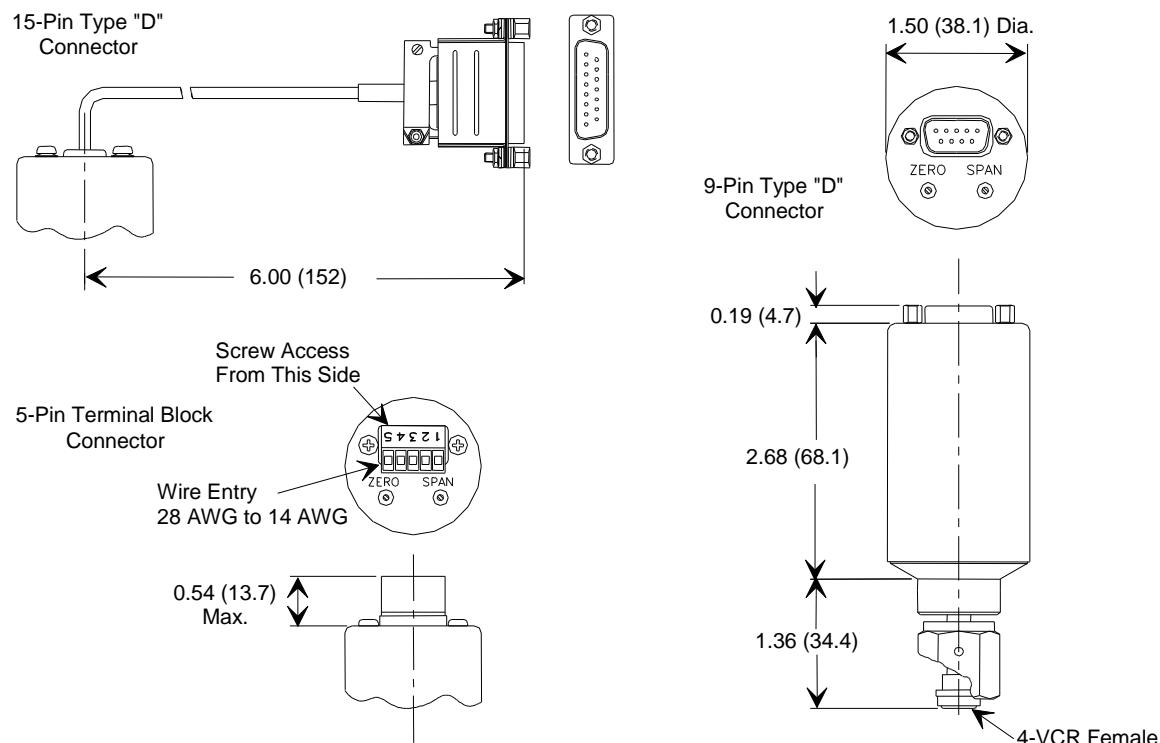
Dimensions of the High Pressure (>1000 to 25,000 Torr) Type 722C Transducer
